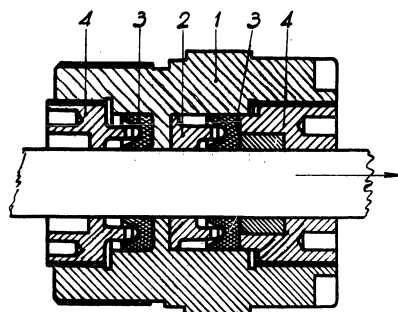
RECUPERATOR STUFFING BOX — ASSEMBLY
